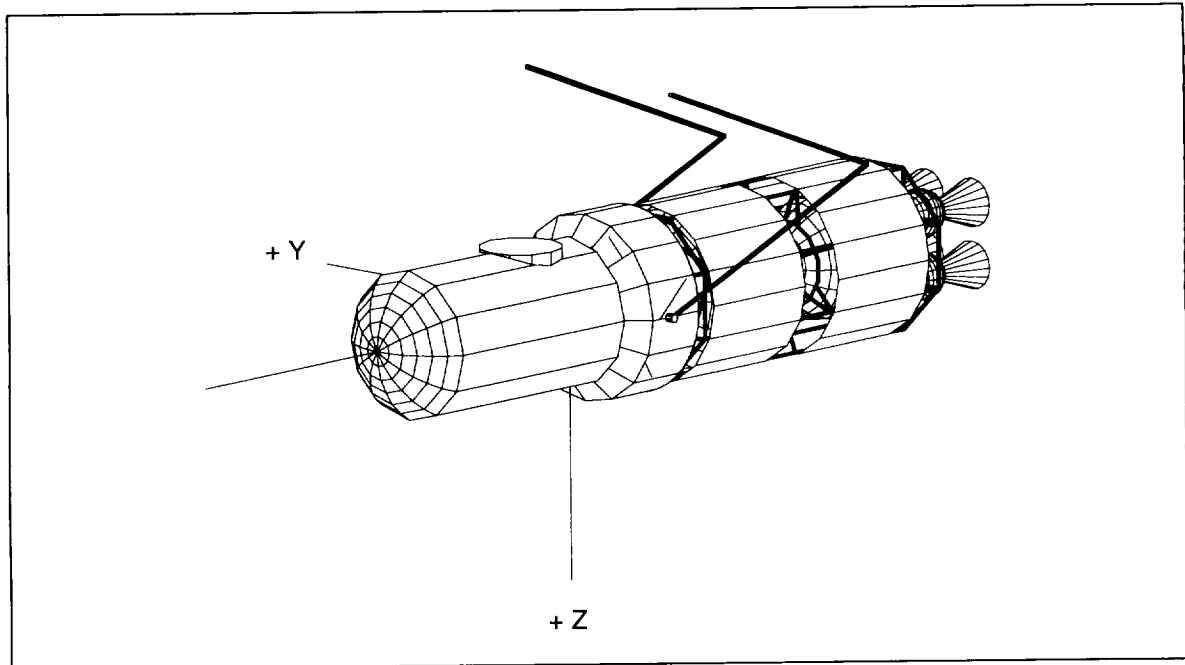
CAD drawing showing Freebird coordinate system.
